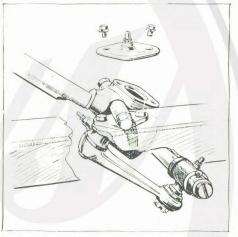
The Steering Gearbox of the 11 H.P. "Standard" with 11s Cover Plate Removed,
